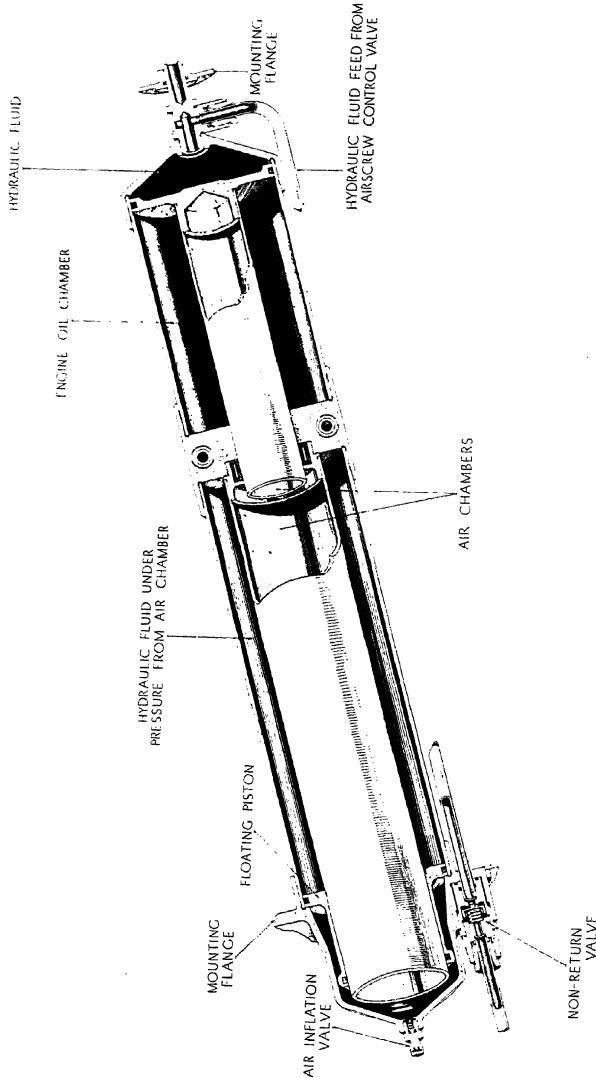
Engine Oil and Hydraulic Fluid Isolator for Feathering Airscrew Control
